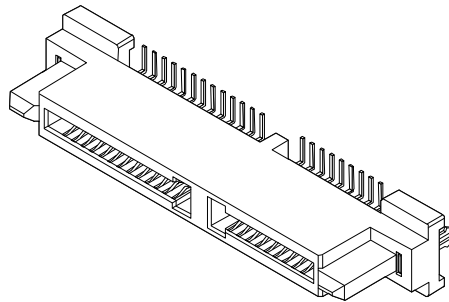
Desktop Bay PCB Mount Receptacle Reference Design
